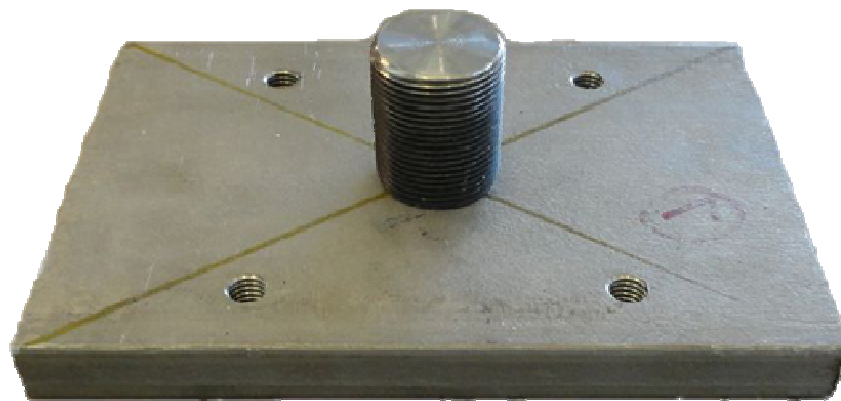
This is the finished product with the 1 1/2"-12 bolt in place. 1/2"-13 rod will be cut and placed in the 4 holes which will locate in the jack loading pad.
